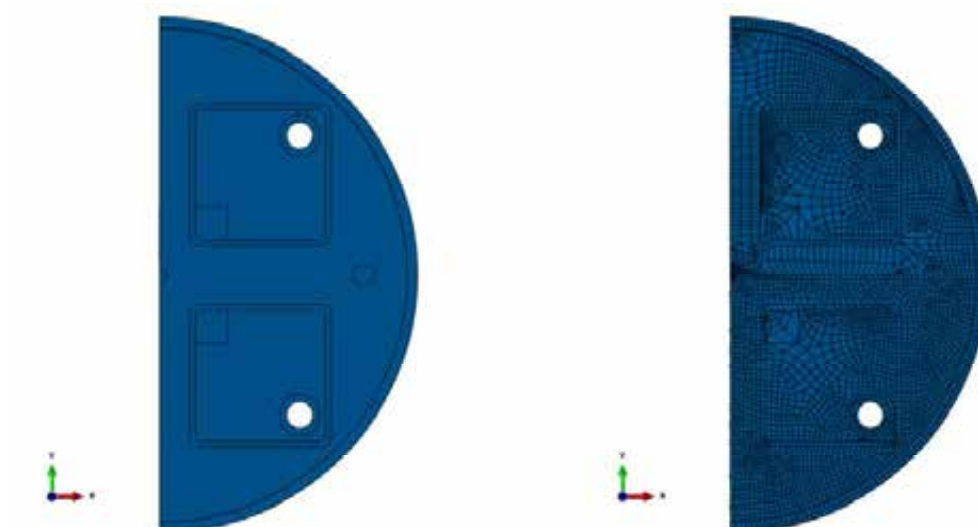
Insert PWR geometry (left), and mesh (right) – top view.
